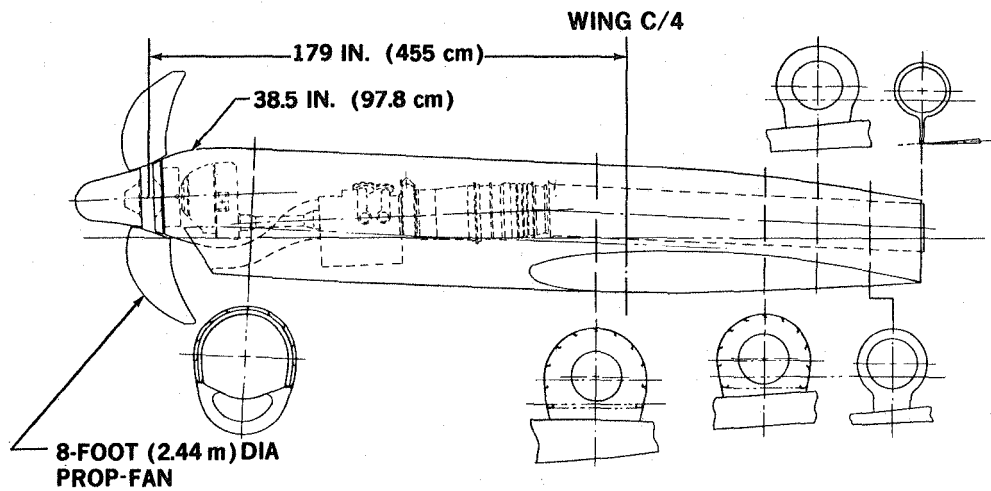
INSTALLATION OF ALLISON T56 ENGINE AND PROP-FAN ASSEMBLY ON DC-9-10 AIRCRAFT WING
